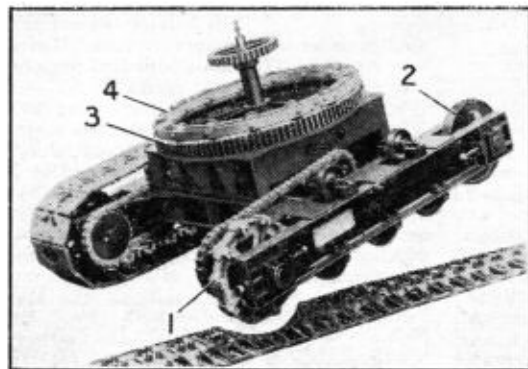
The undercarriage of the "Wolf" Excavator, which carries the crawler tracks. The final drive to the crawlers is by heavy roller chain.
